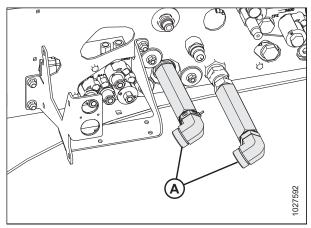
Hard Plumbed Connections – Rotary Disc Ready Windrower
